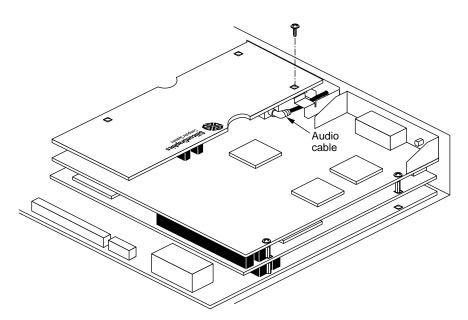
Inserting the Screws on the XZ Adapter Board
